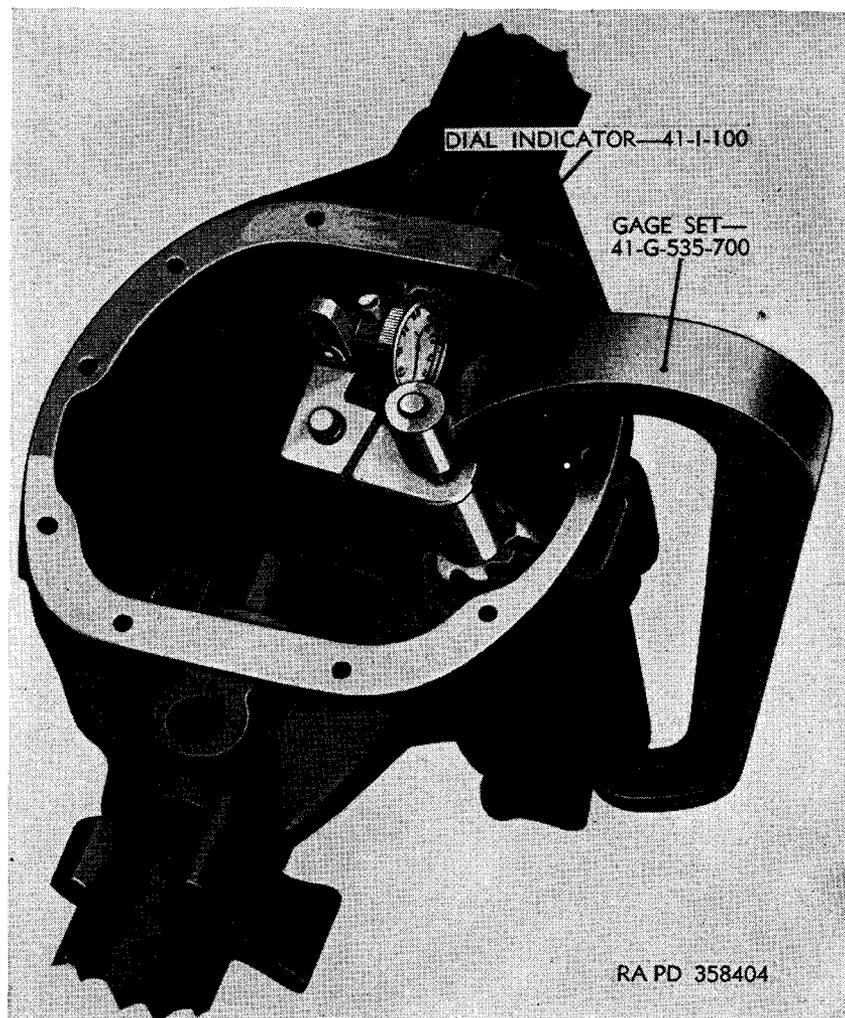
Checking pinion in differential housing with gage set 41-G-535-700.
